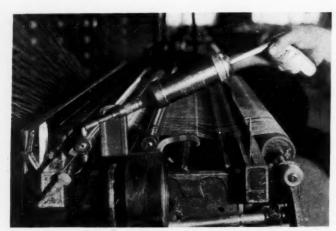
Dripping oil would spoil much of the thread passing through this machine
